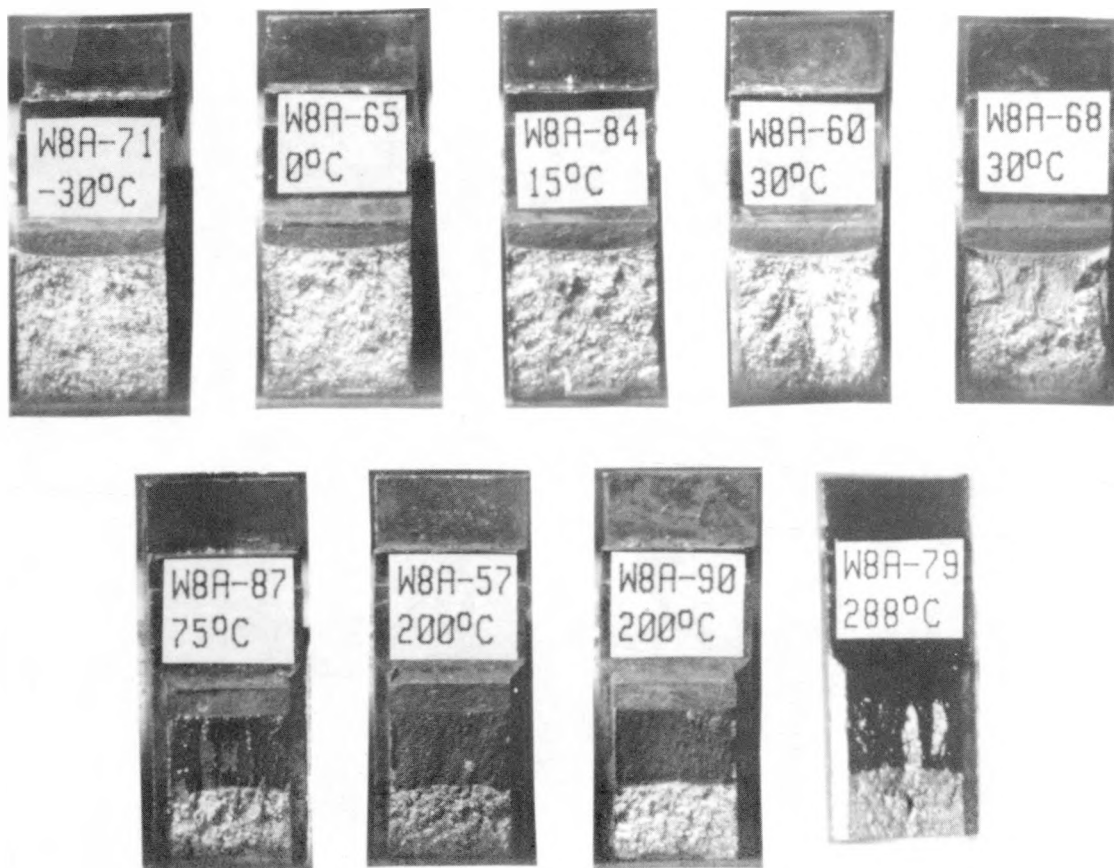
Fracture surfaces for the Linde 80 weld (W8A), in the I condition to a fluence of $1.5 \times 10^{19} \text{ n/cm}^2$.
